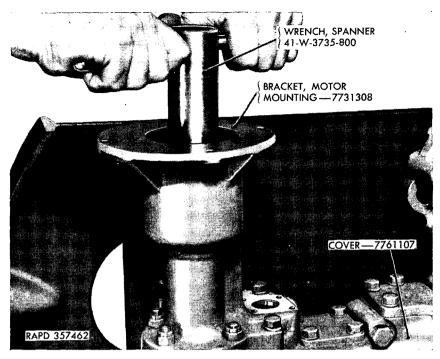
Removing or installing of bearing lock nut on drive gear shaft.
